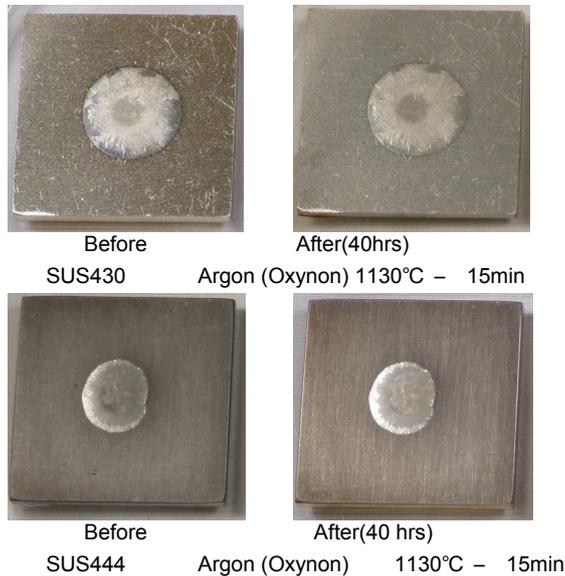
Spreading test piece surface after corrosion testing. Salt water spray corrosion test. (40 hours).
